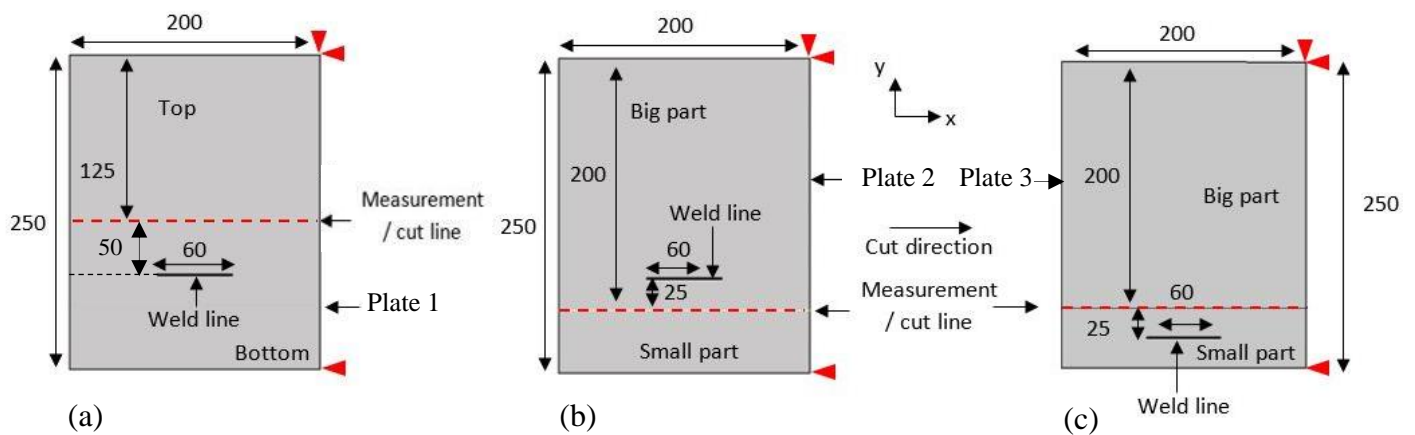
Schematic view of the boundary conditions, and weld locations of the laser welded plate for a symmetric cut (a) and asymmetric cuts (b) and (c). Dimensions are in mm.
